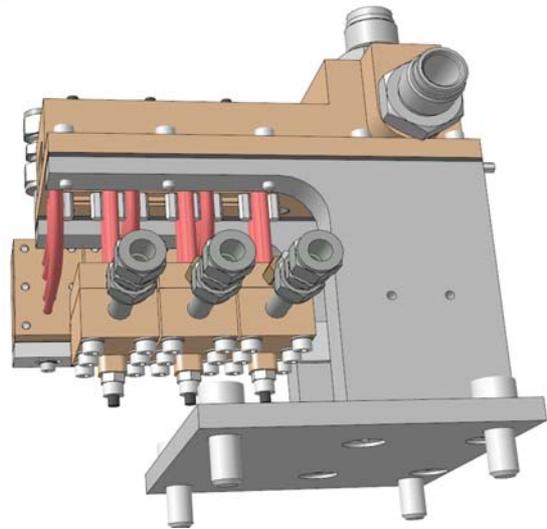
Low side view of test article with grey mounting structure clearly visible.
